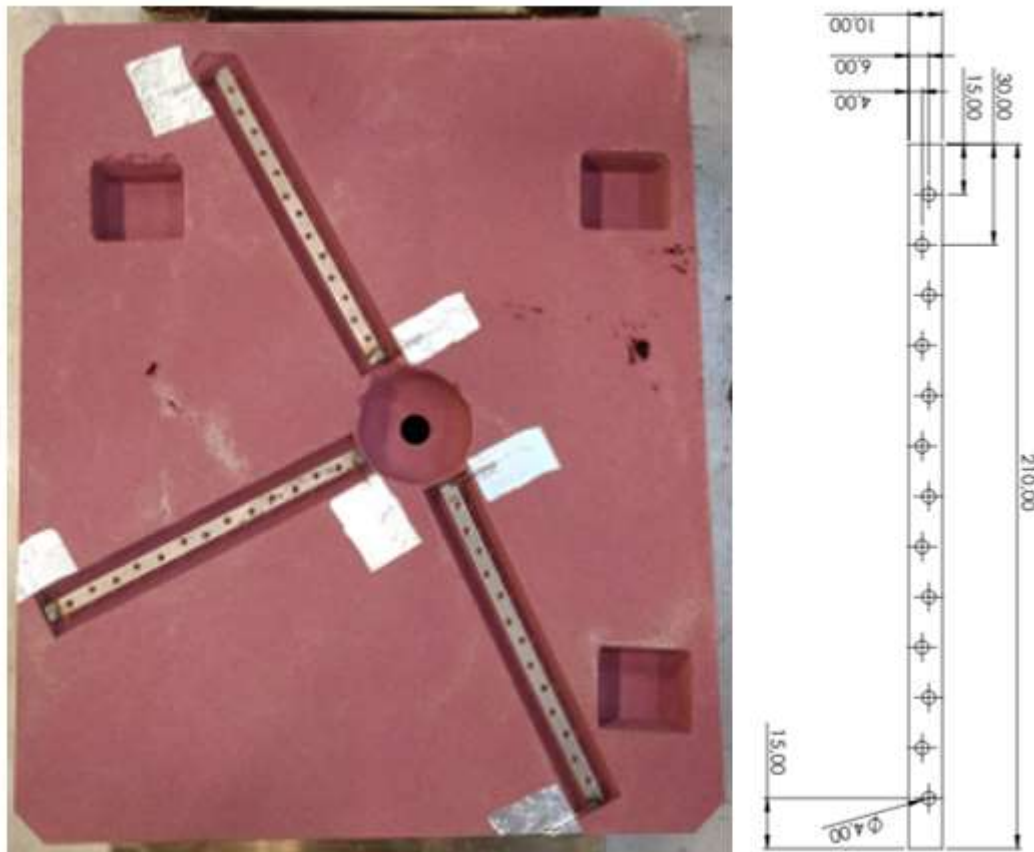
Mold with placed steel inserts (left) and insert technical drawing (right)
